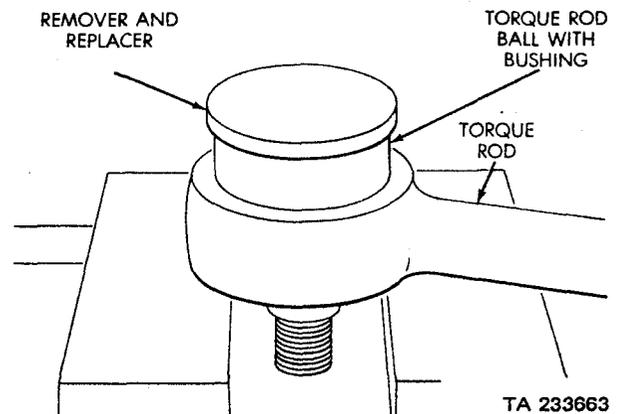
Removing or installing torque rod ball with bushing using remover and replacer
